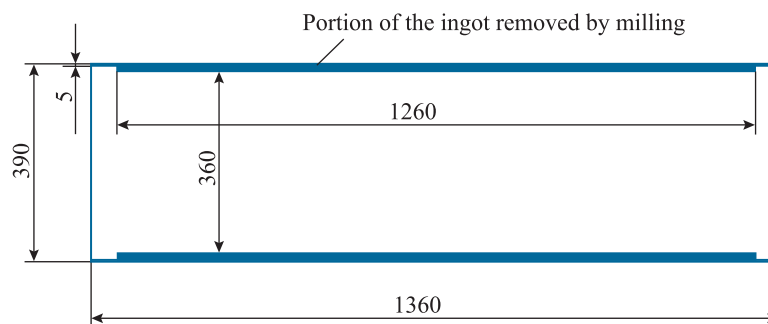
Portion of the ingot surface to be removed by milling in the new cladding scheme
